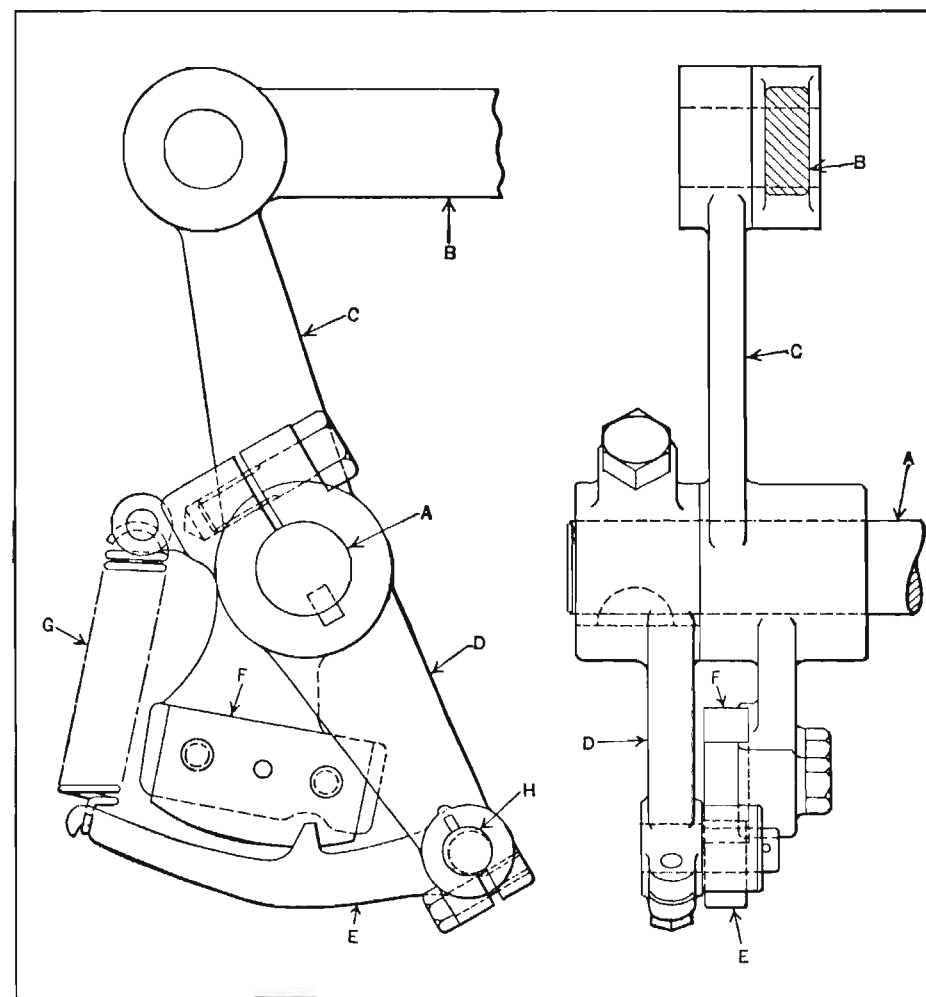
Arrangement for Automatically Disengaging a Driving Lever from its Shaft when the Load Becomes Excessive
